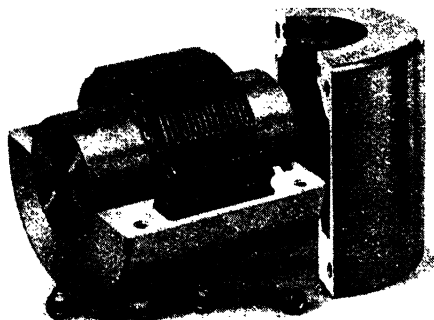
Morse Inverted Tooth Chain Coupling.
